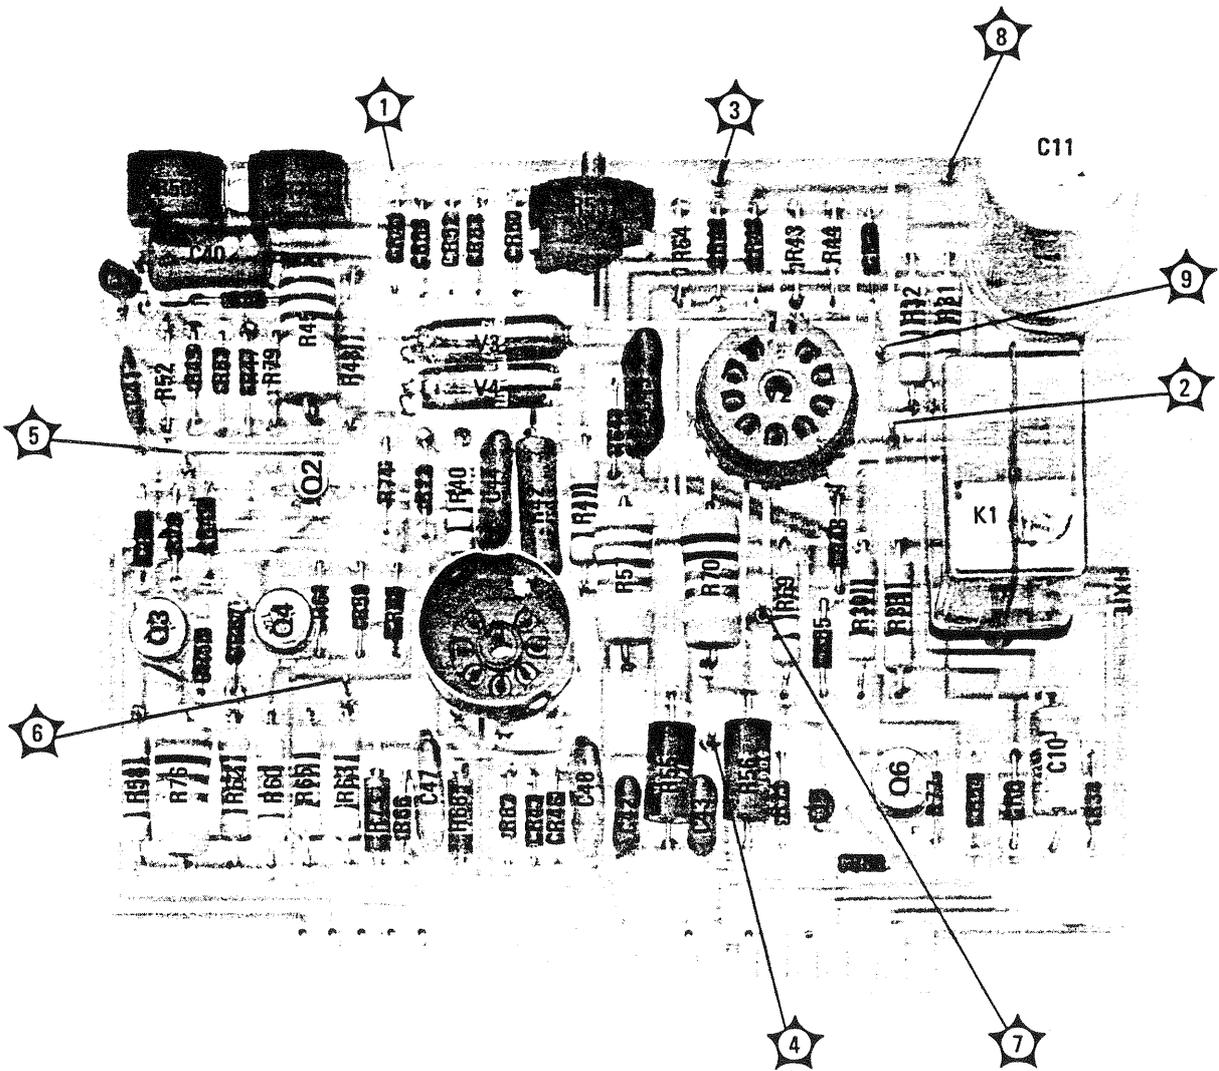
Component Identification, Assembly A3 (Part of Change 1)
